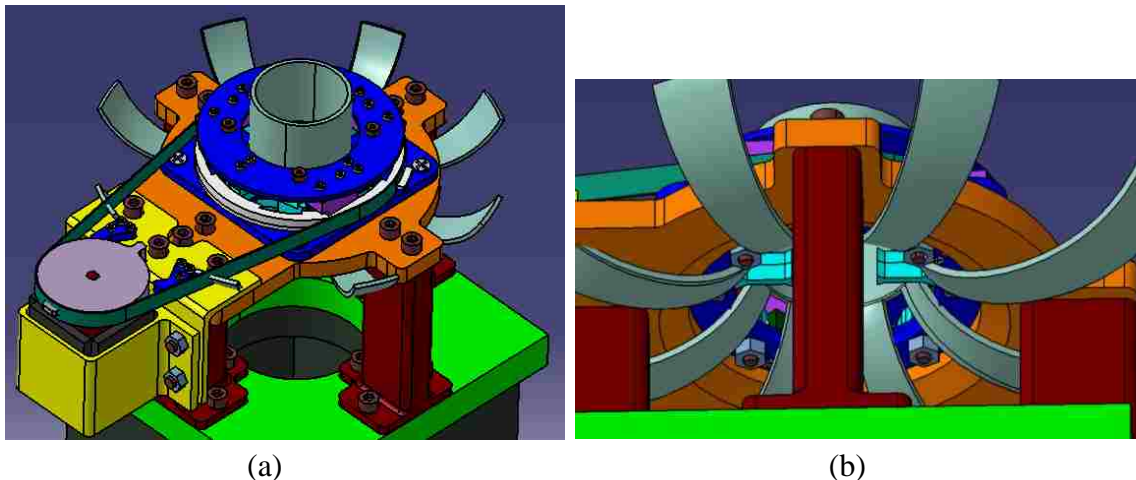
(a) CAD model of the adaptive cutter using a belt drive and an elevated support structure. (b) Underside showing petals flaring with 8 blades.
